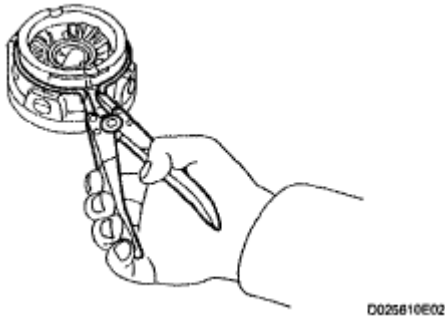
Installing Pinion Shaft Spacer Snap Ring
